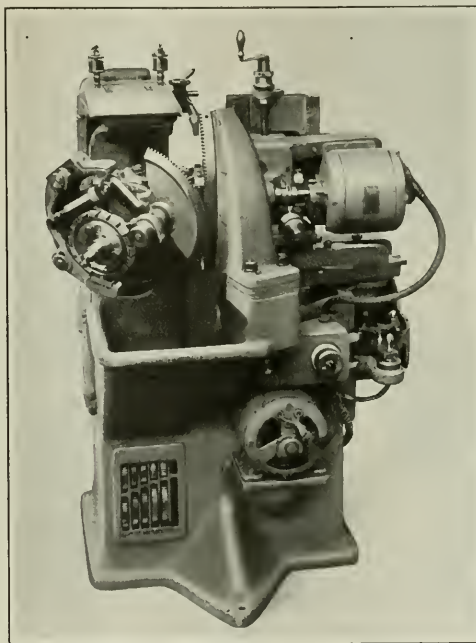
Gleason 4-inch Spiral Bevel Gear Generator
